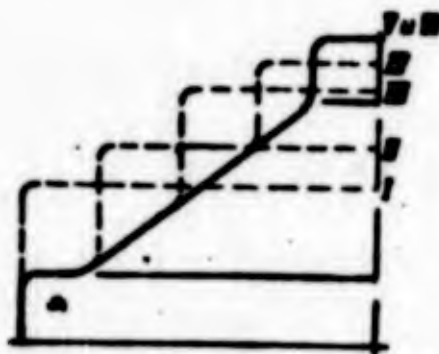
Operations of stamping intake cone of flame tube of combustion chamber. I-V) drawing; VI) forming.
